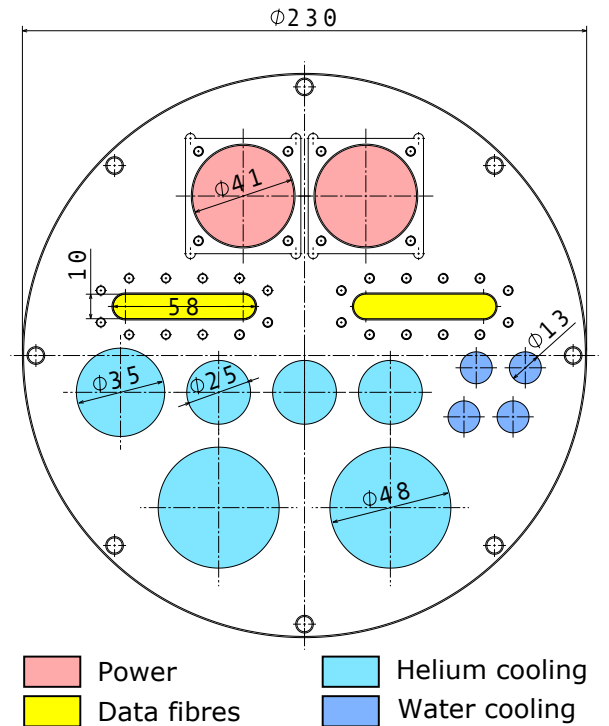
Drawing of the cabling flange. Additional ports will be added for auxiliary use. Dimensions in mm.
